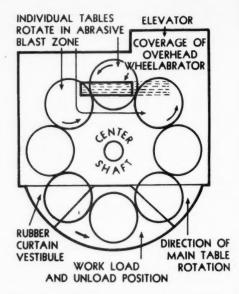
Diagrammatic view of operating principle of a multi-table blast machine.
